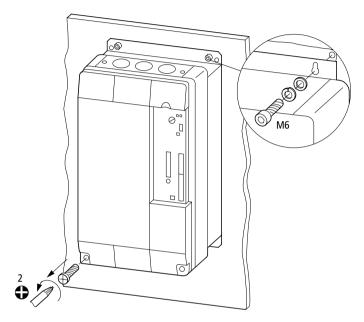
Installation on mounting plate, DM 4-340-7K5 to DM 4-340-200K
